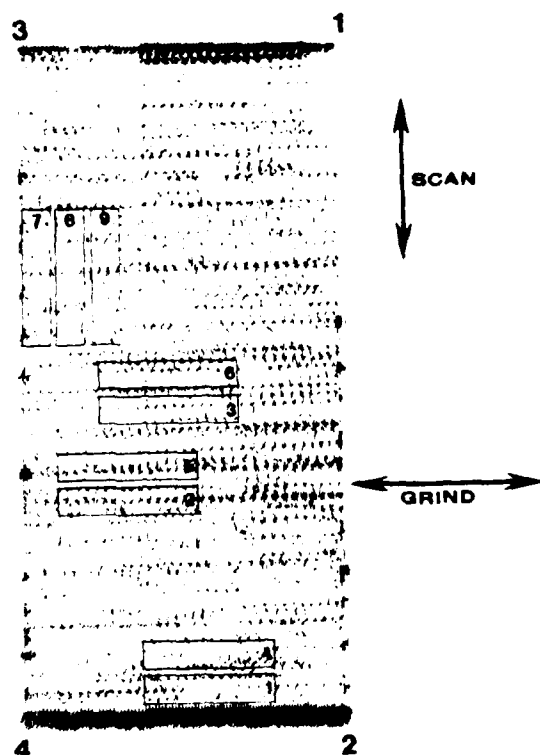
C-Scan Recording of 45 MHz Ultrasonic Surface Wave Inspection of Bottom Surface of Billet of NC-132 HPSN (Scan Perpendicular to Grinding Direction).
